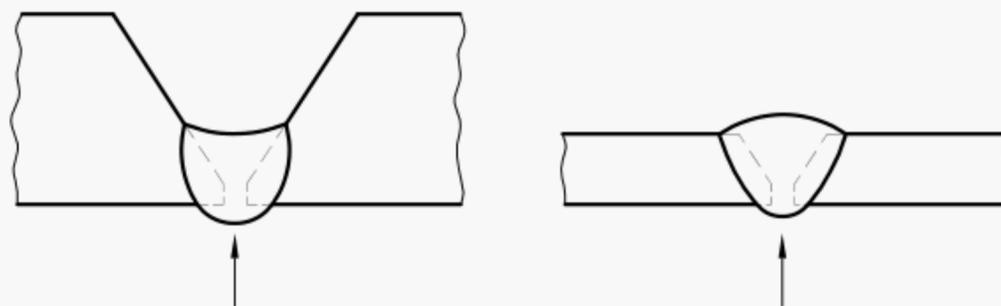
EXAMPLES OF PENETRATION BEAD
